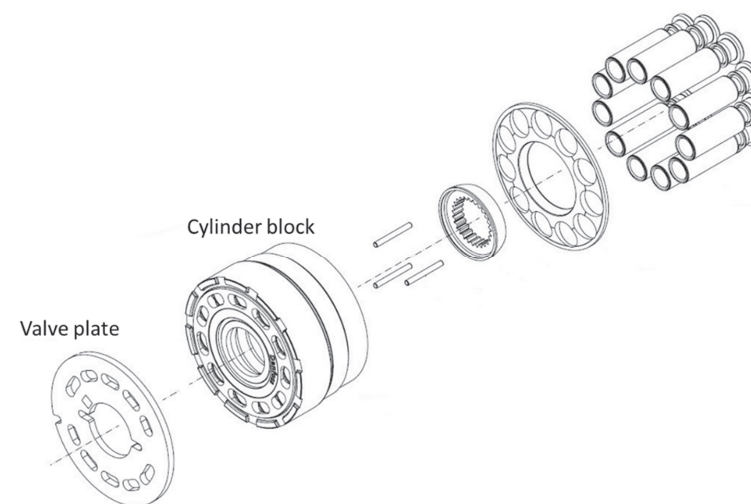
Exploded view of the rotational kit of a swashplate type axial piston pump
